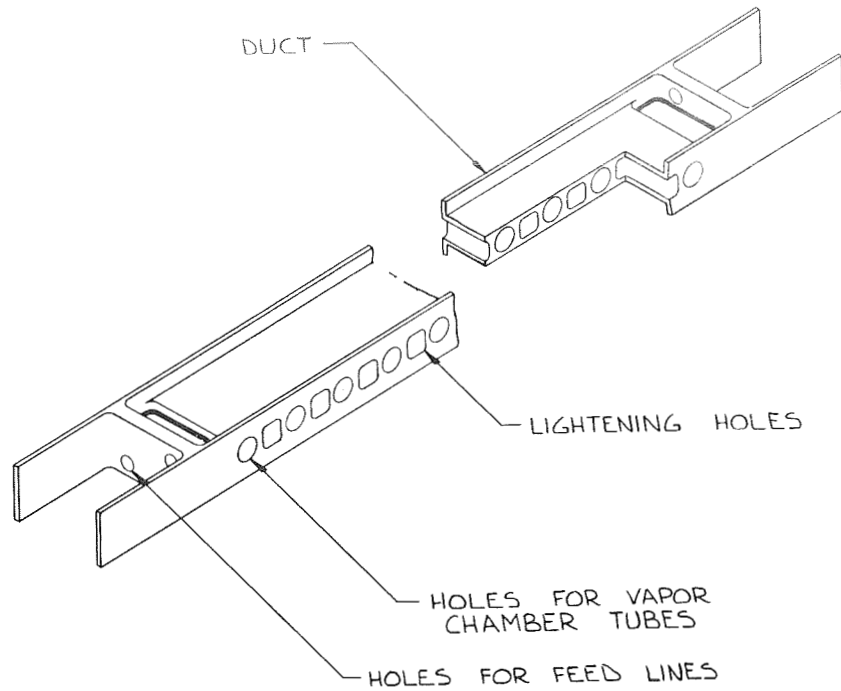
Vapor Chamber Fin Radiator Assembly Sequence Step 1
